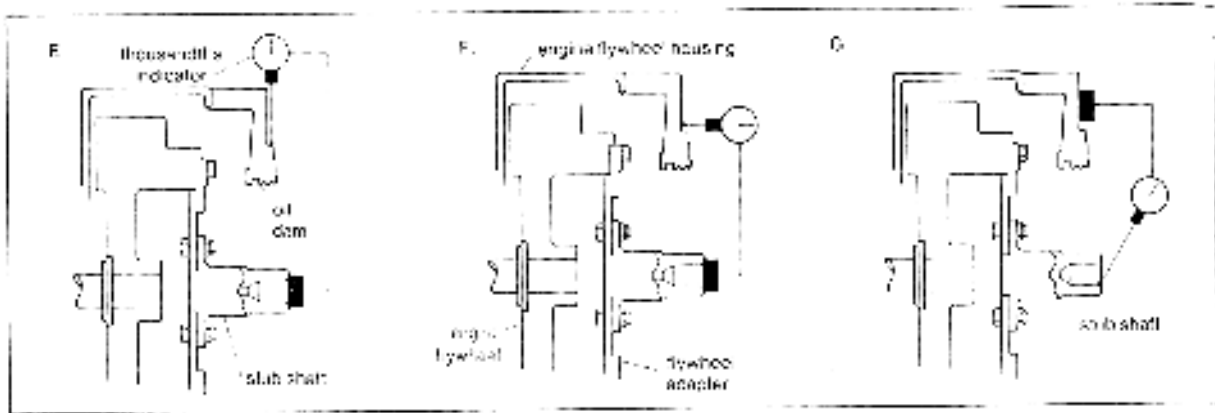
Dial Indicating Oil Dam and Stub Shaft.
